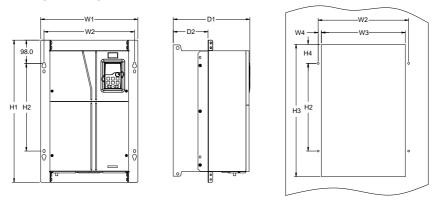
Flange mounting for 660V 22-132kW VFD models
